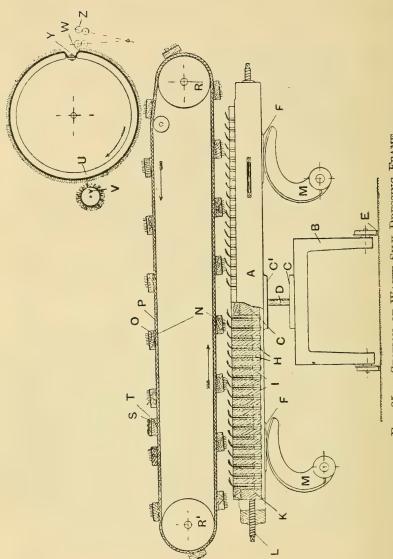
A.—SECTION OF WASTE SILK DRESSING FRAME.
